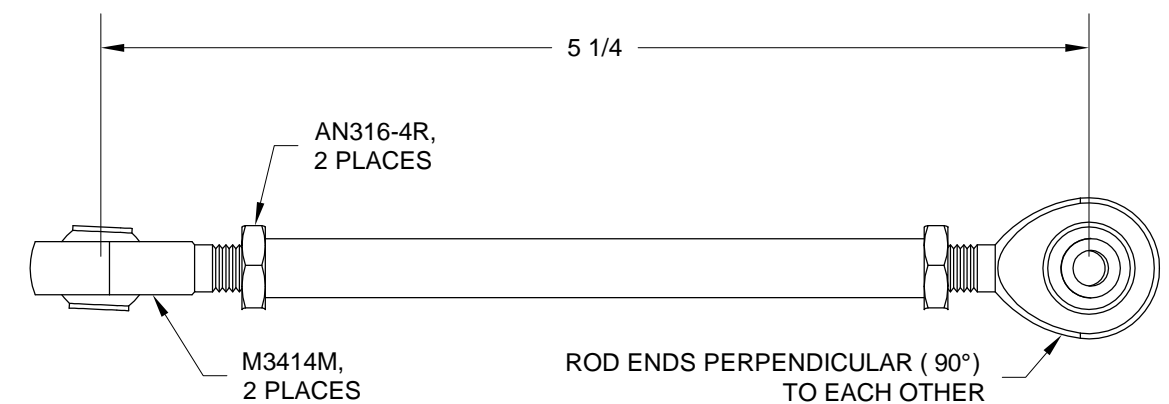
ROLL SERVO PUSHROD ASSEMBLY
